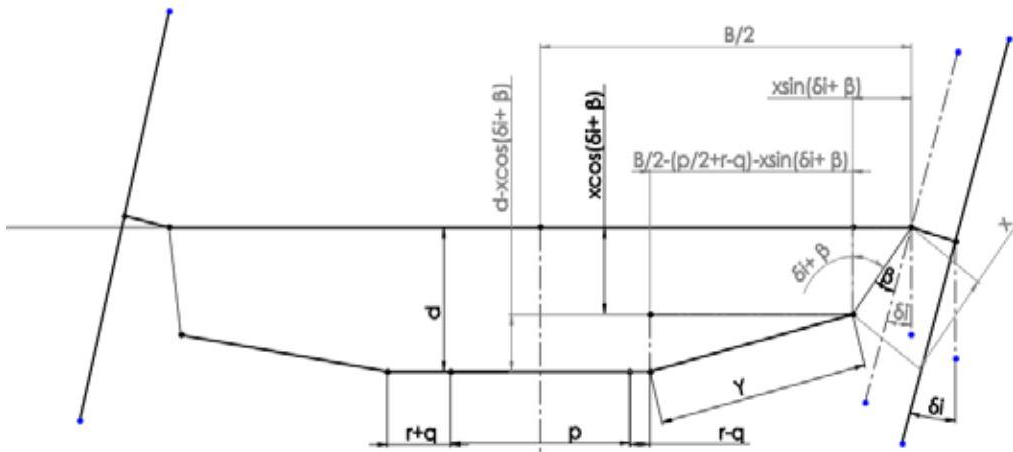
Rack-and-pinion geometry. Inner wheel angle
